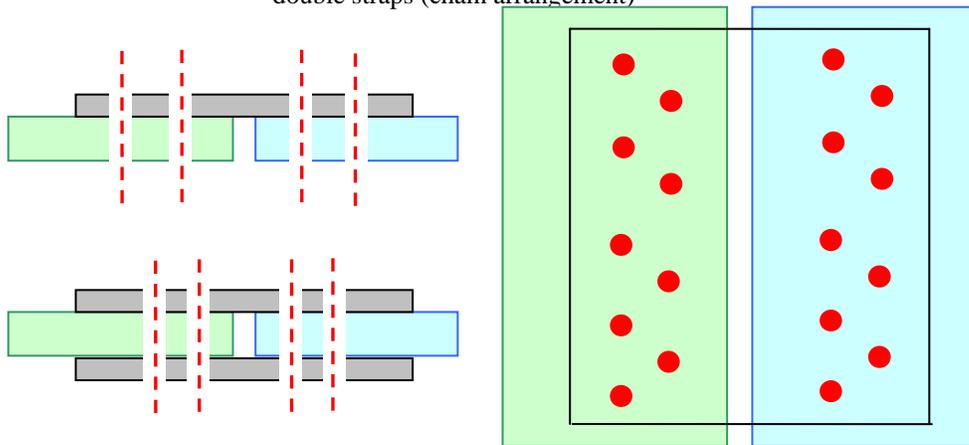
(c): Double riveted butt joint with single and double straps (zig-zag arrangement)
